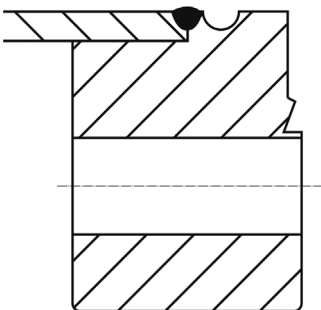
Sketch of a flange-to-tube weld with a heat insulating groove.
